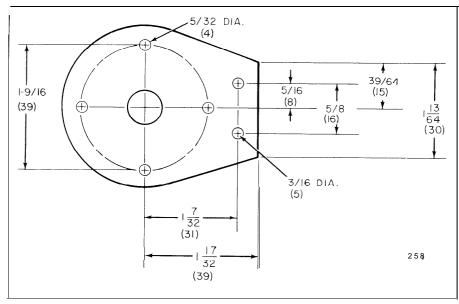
FLAT BRACKET APPROXIMATE DIMENSIONS IN INCHES (MILLIMETERS) OF PART NO. 14002808-001.
